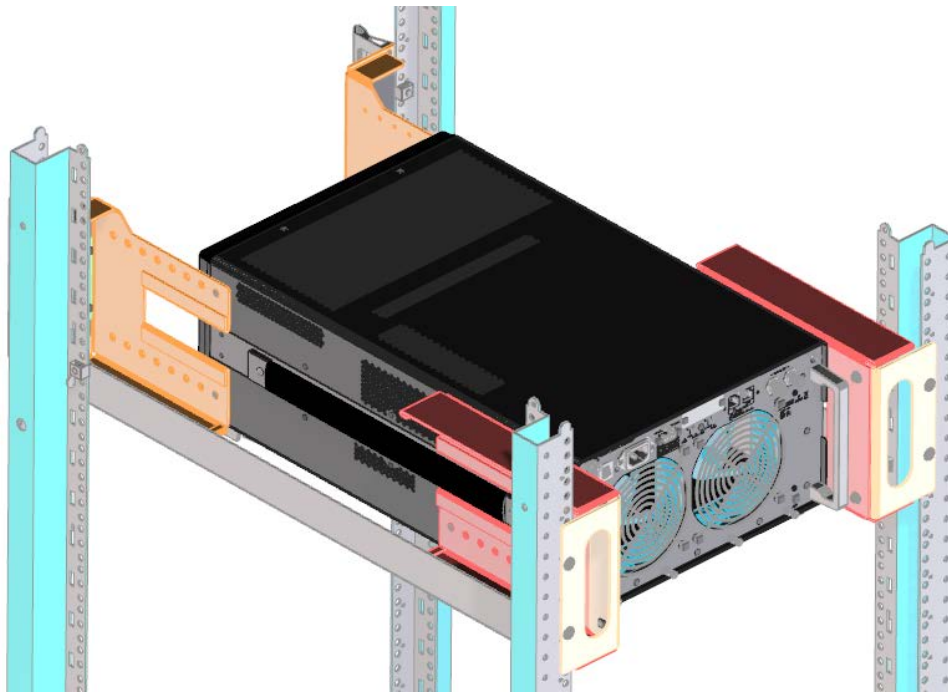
Example of Final Installation (Recessed Mount, Rear View)
